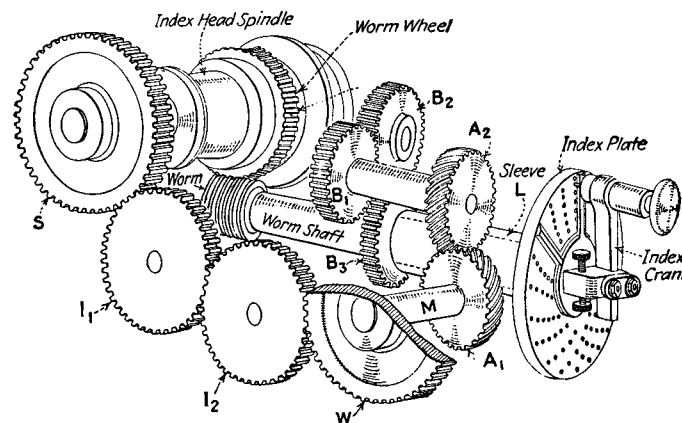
This figure illustrates the gearing for differential indexing with a Brown & Sharpe index head (extended for clearness). In practice, one idler, or two idlers, or a compound of any two of the change gears with or without an idler, may be used between the gears *S* and *W*.
